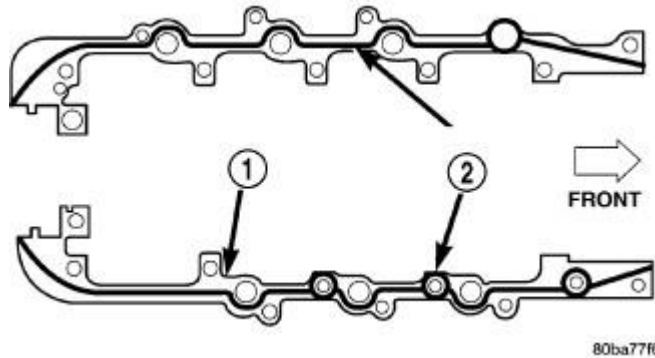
Cylinder Block-to-Bedplate Sealant Bead Location
